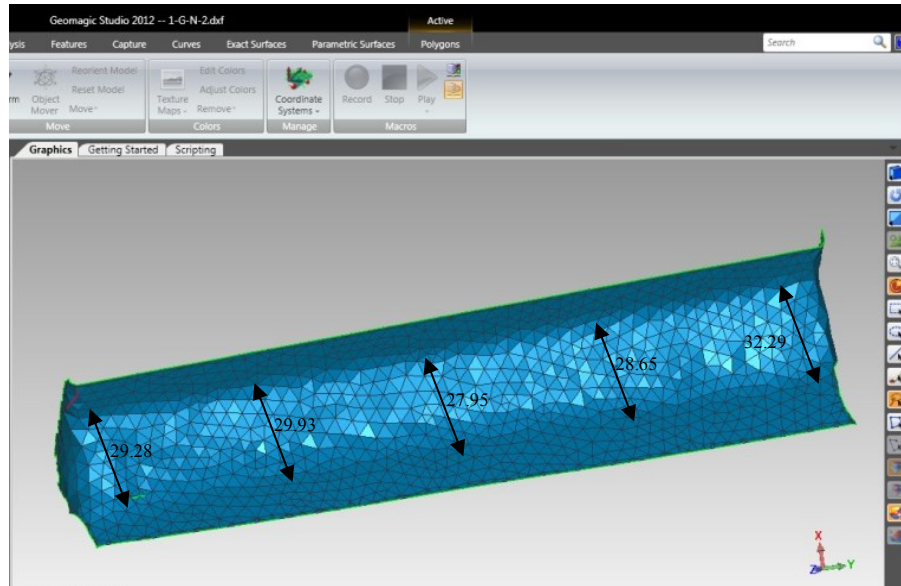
The resultant surface weld profile for test setup G-N-2.
